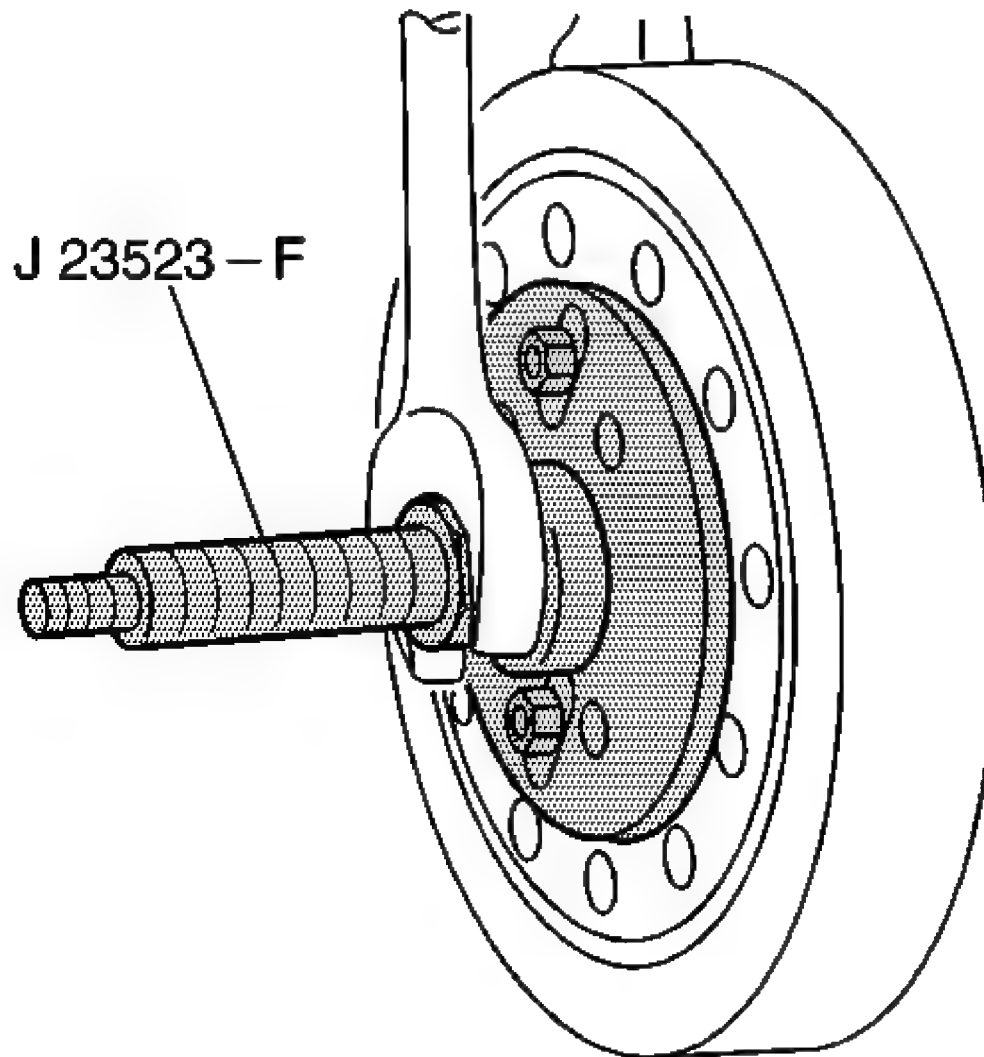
Pressing Crankshaft Balancer Onto Crankshaft
